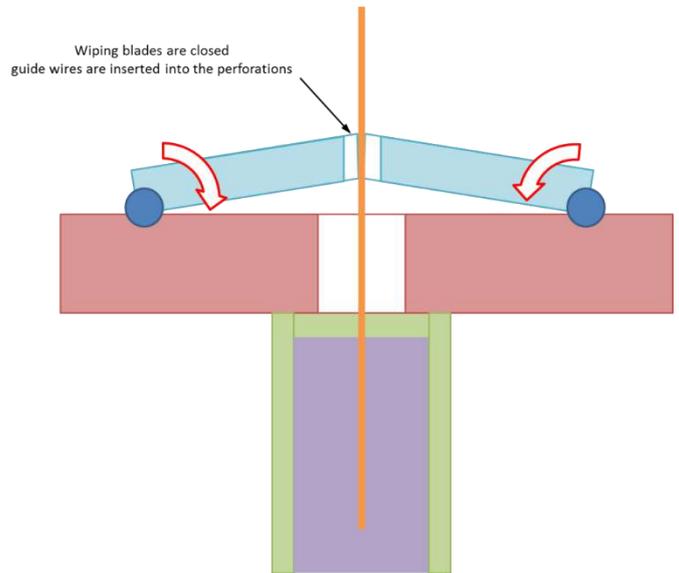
Old wiping device, closed, wires threaded into perforations.
